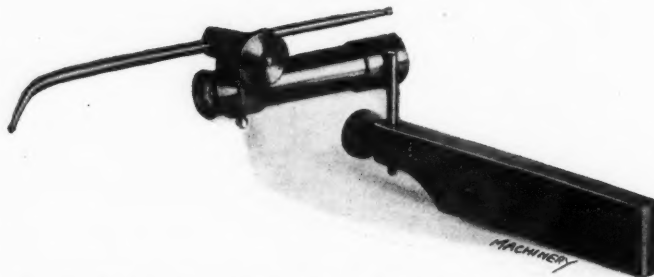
Xander Electric Test Indicator provided with Holder to mount in Toolpost
